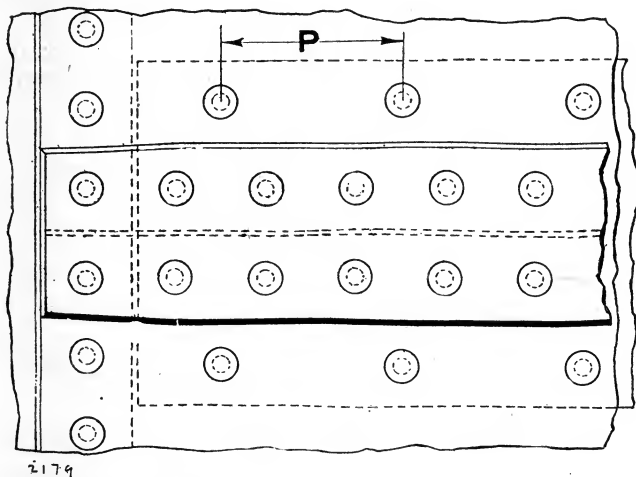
,868.—Example of butt and double strap joint, double riveted.
